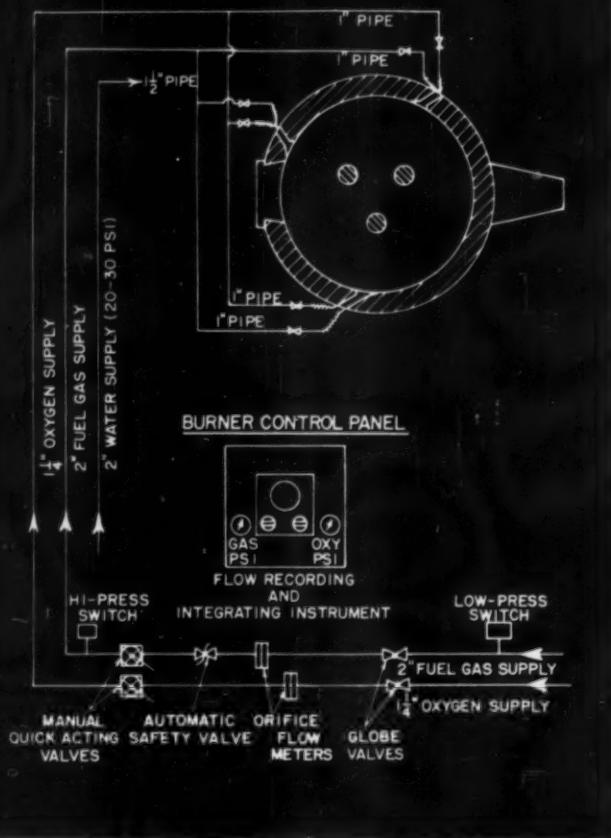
Schematic view showing burners and controls for a wall burner electric furnace installation by LINDE.
